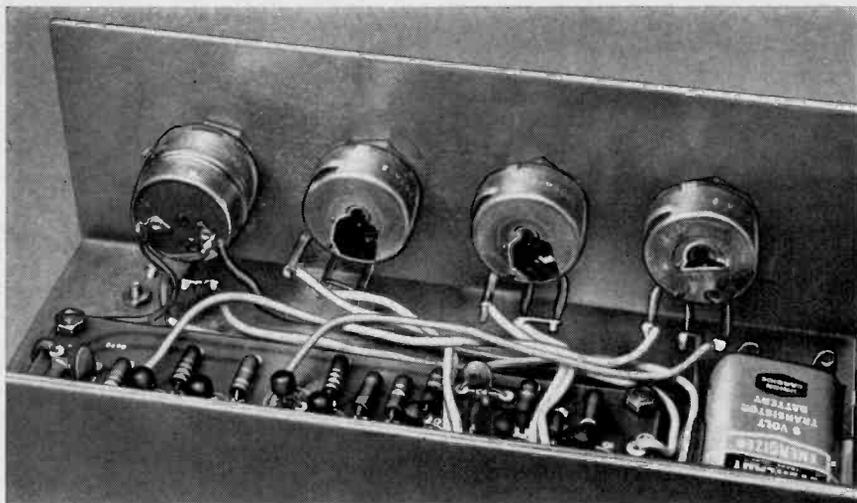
All controls, except pots R28 and R29, are mounted on front panel. Battery holder and printed circuit board are mounted inside the chassis; use rubber feet on under side.
